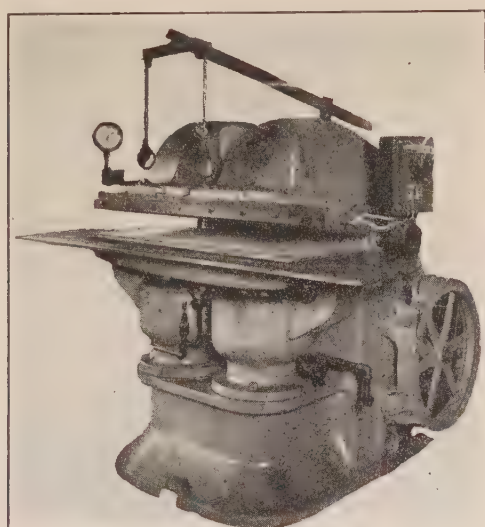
ELECTRICALLY HEATED PLATING AND EMBOSING MACHINE
